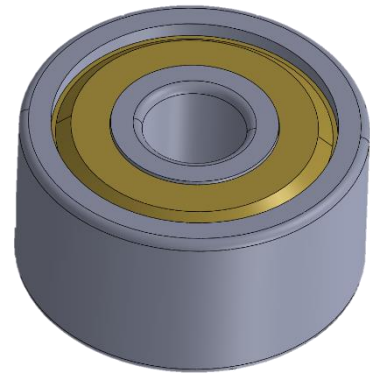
A 2.5 mm high bearing with an outer diameter of 5 mm and an inner hole of 1.5 mm. 5 0.6mm small balls are inside the bearing allowing the rotation. The bearing is sealed, and no air nor water enters.
